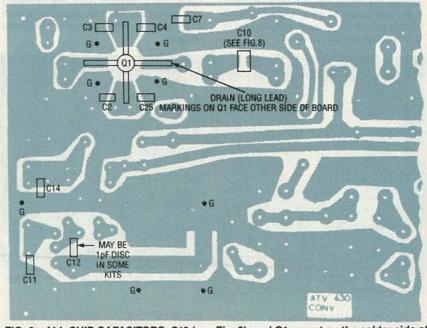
ALL CHIP CAPACITORS, C10 (see Fig. 8), and Q1 mount on the solder side of the board. The markings on Q1 face the component side of the board.
